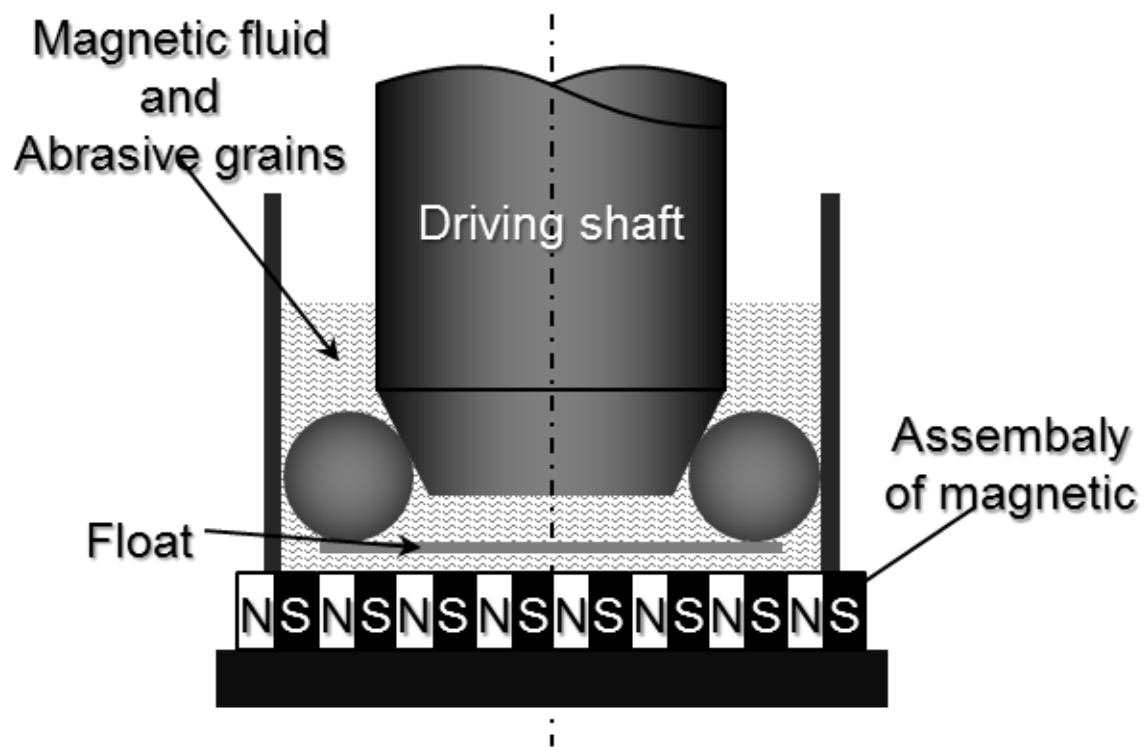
Schematic view of magnetic fluid grinding machine [14]
